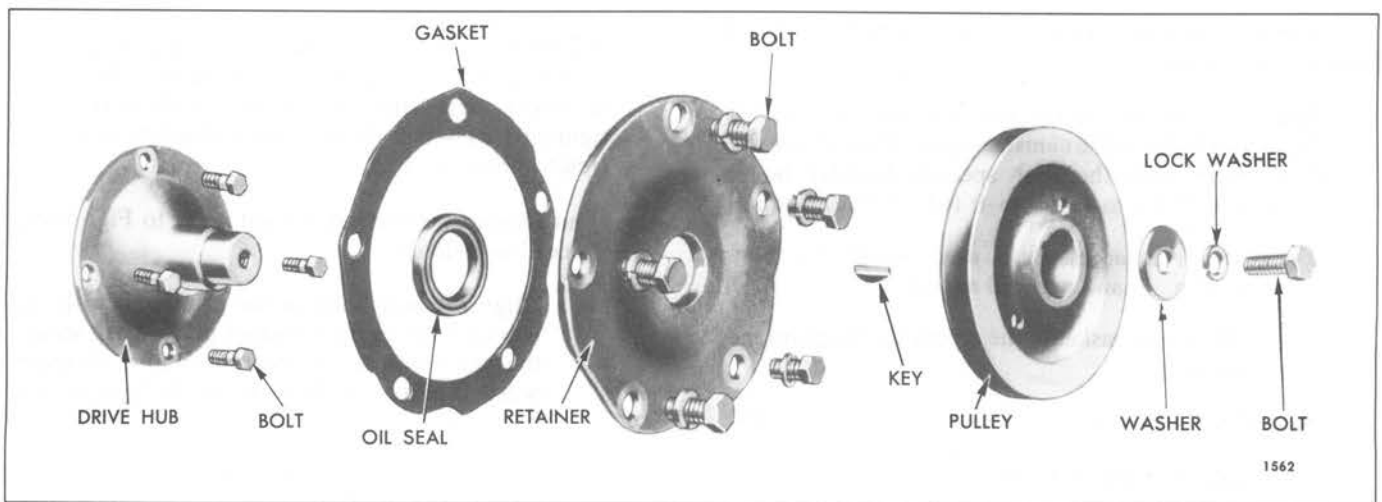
Components of Accessory Drive for Belt-Driven Accessory (Drive Hub Type)
